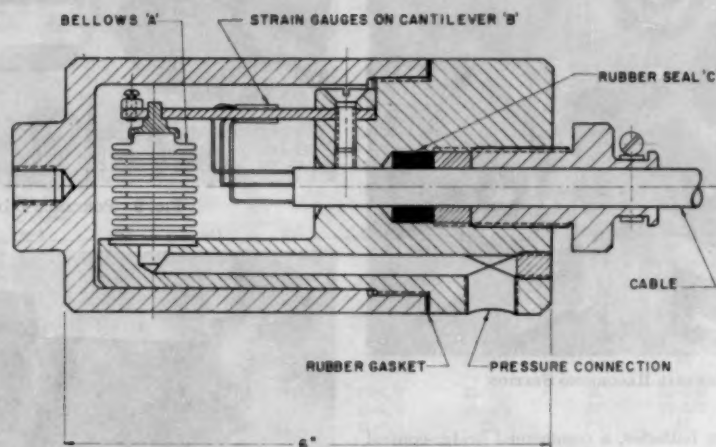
CROSS SECTION OF REMOTE-READING FLUID PRESSURE GAGE
